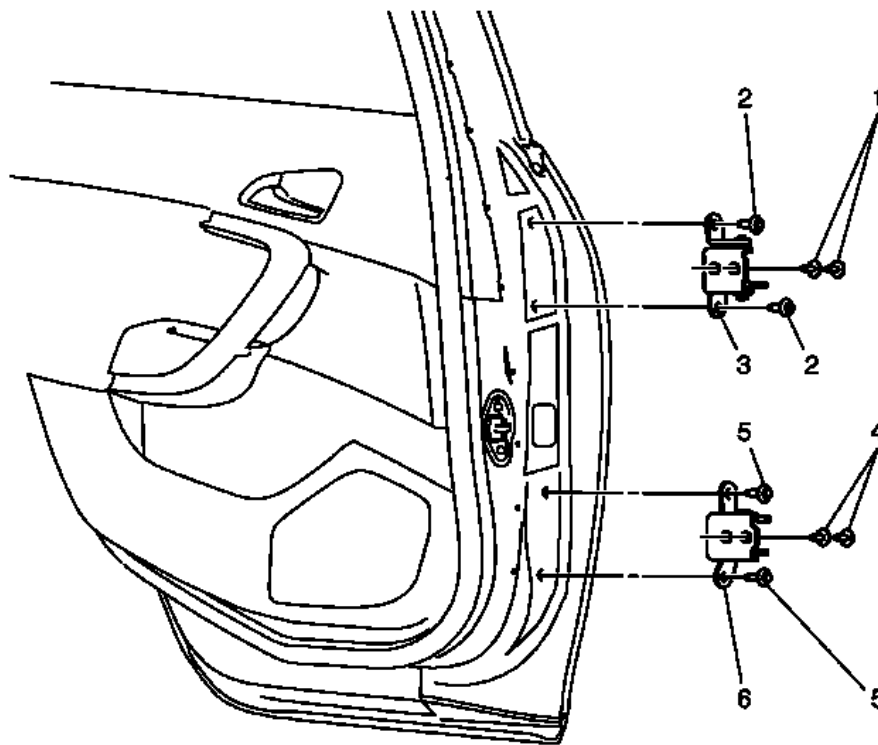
Rear Side Door Upper Hinge And Lower Hinge
